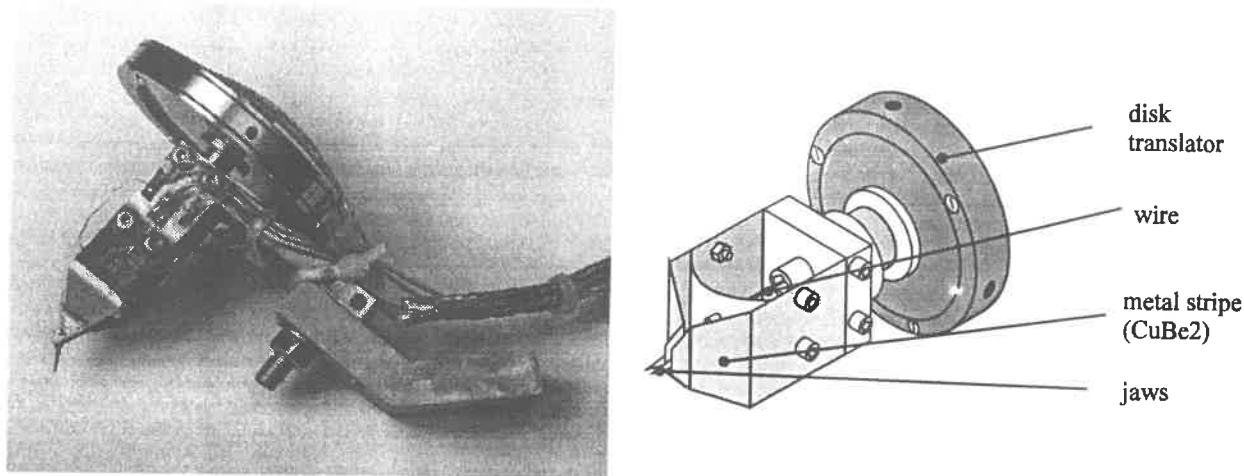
Mechanical gripper for micro assembly inside a LC-SEM
